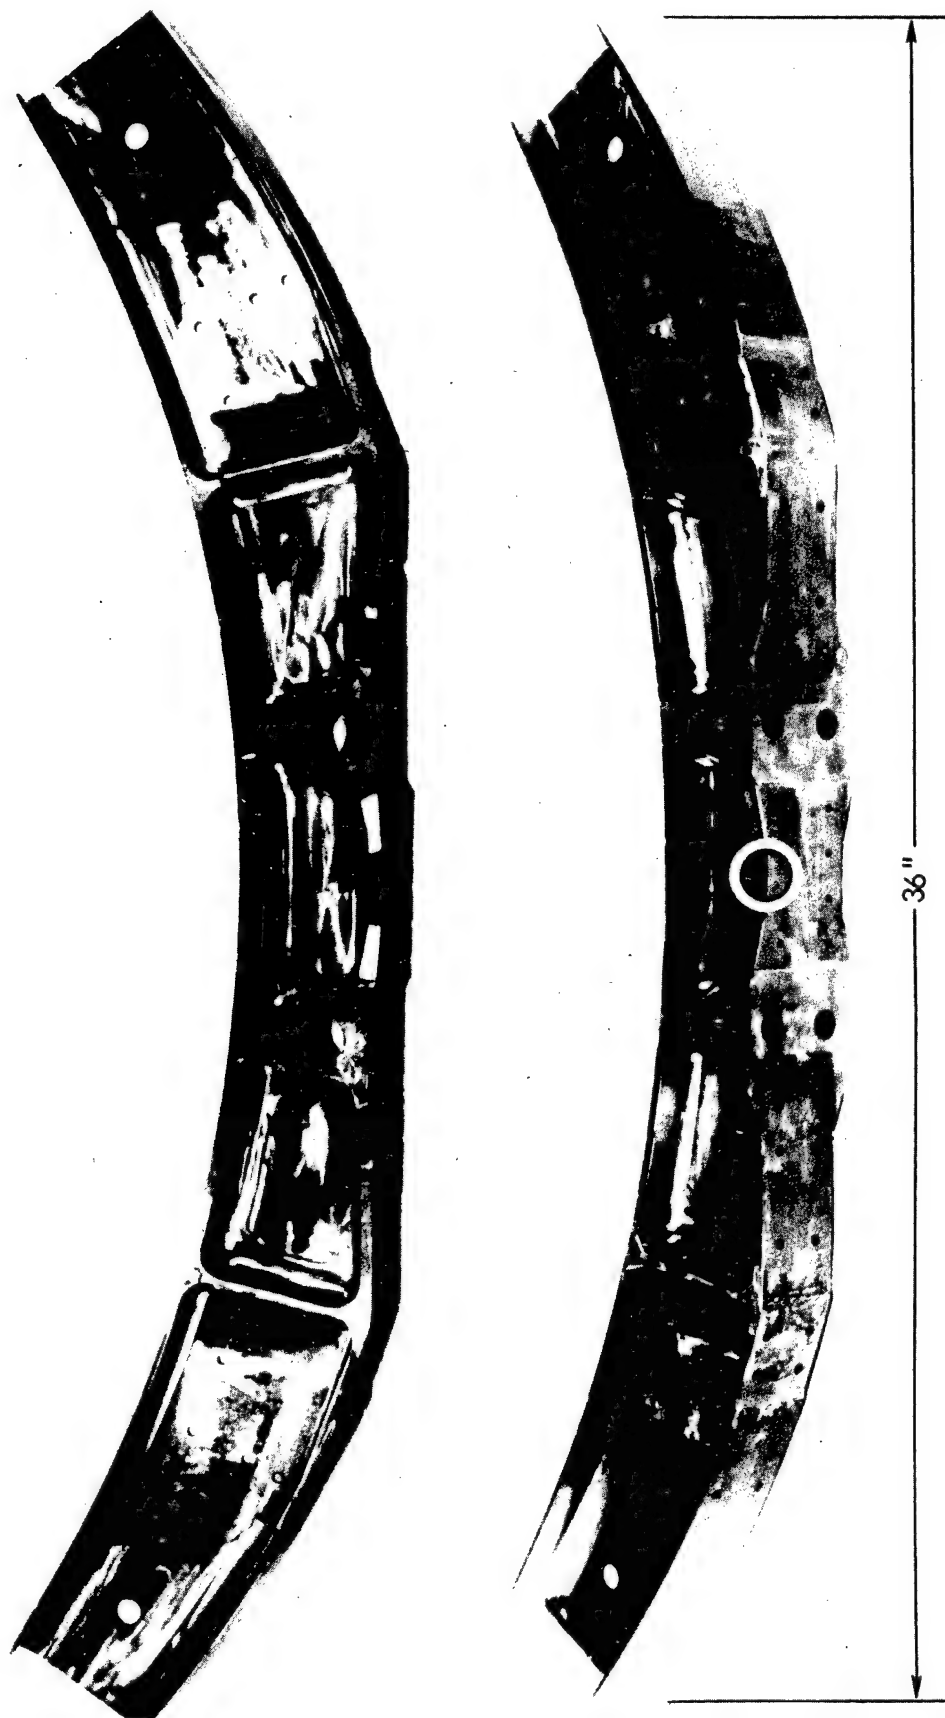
TYPICAL MACHINED ALPHA-BETA FORGING READY
